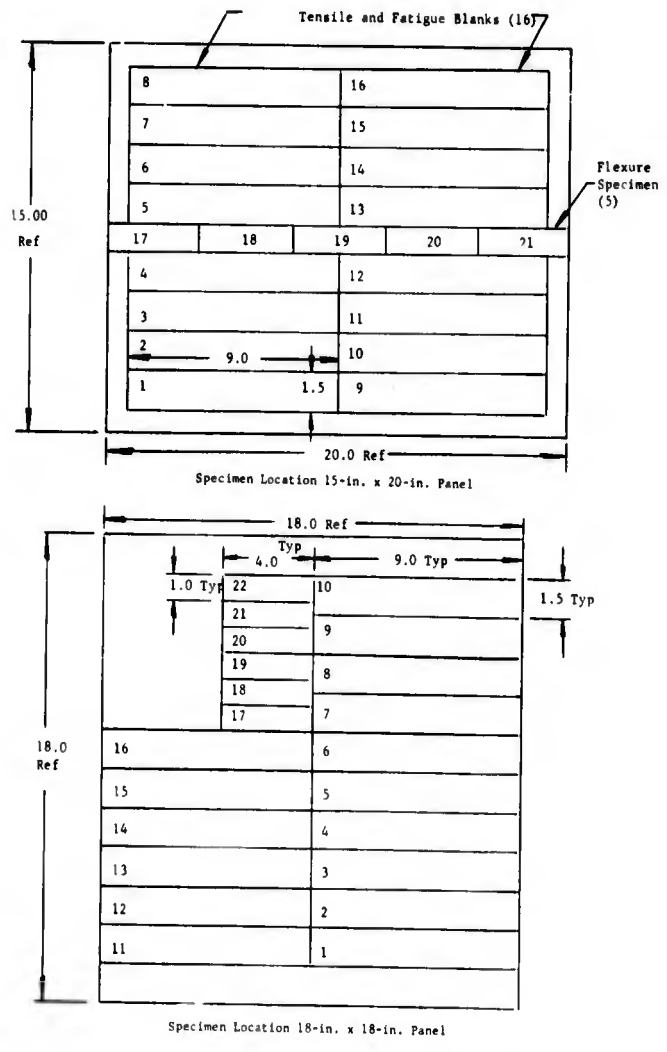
Cutting Diagram and Specimen Location for 1/8-in. Panels
